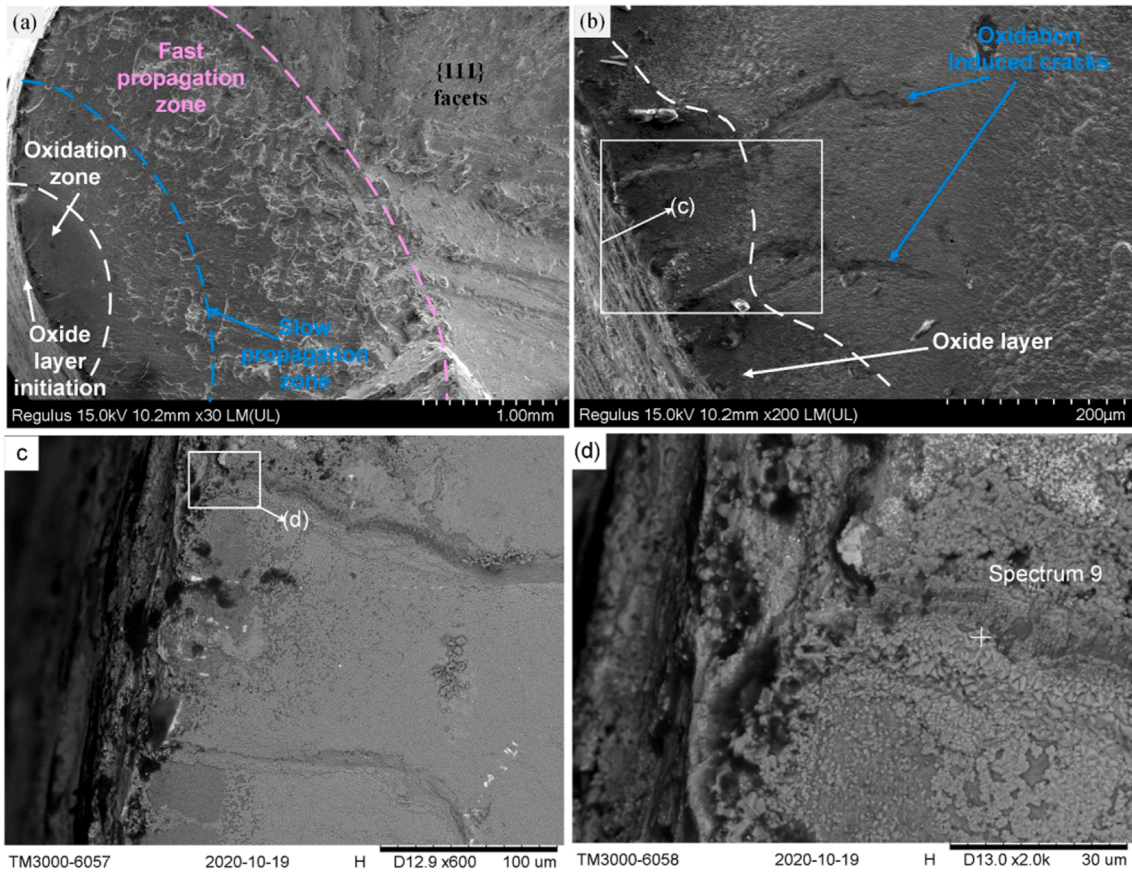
Typical fracture surfaces of pure oxide layer initiation mode. (a) is the typical fracture surface, (b) is the surface propagation zone of (a), (c) and (d) are respectively the high magnification view of the oxidation-induced crack in (b) and (c).
